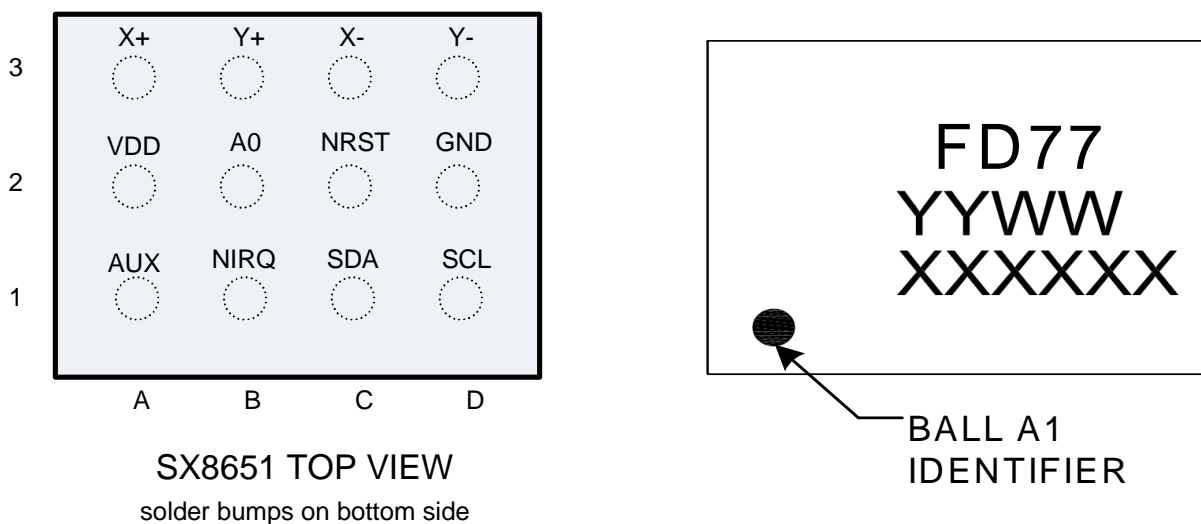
SX8651 WLCSP Top View, Solder Bumps on Bottom Side
